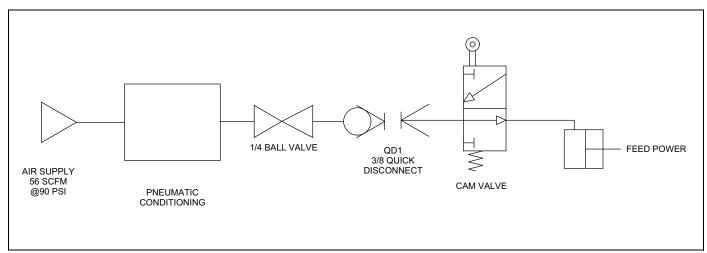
ASSEMBLY SCHEMATIC FOR PNEUMATIC FEED ONLY (USED WITH HYDRAULIC MACHINES) (P/N 87941)
